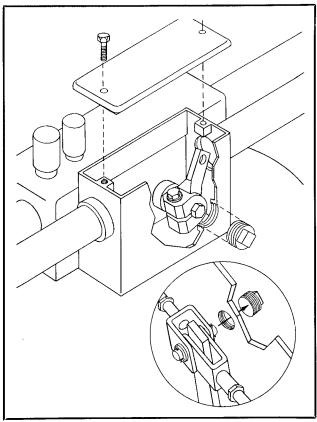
Cutaway View of Pull Rod Housing Box Showing Pull Rod Lever. Inset Shows Access Plug and Clevis Joint Assembly
